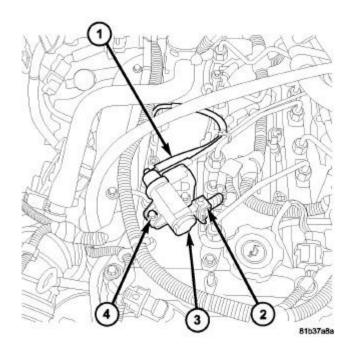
Identifying EGR solenoid Courtesy of CHRYSLER LLC
